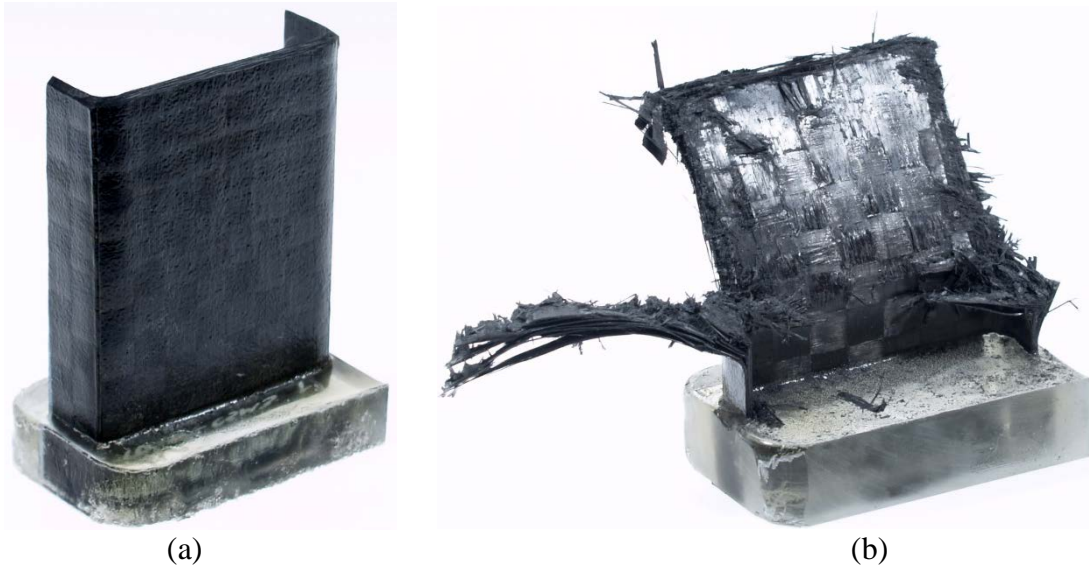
Small C-channel, specimen III, (a) before and (b) after crush testing
